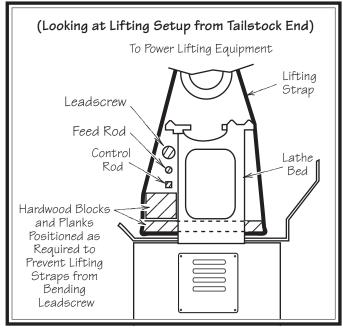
Lifting setup to keep straps from bending leadscrew or rods.
